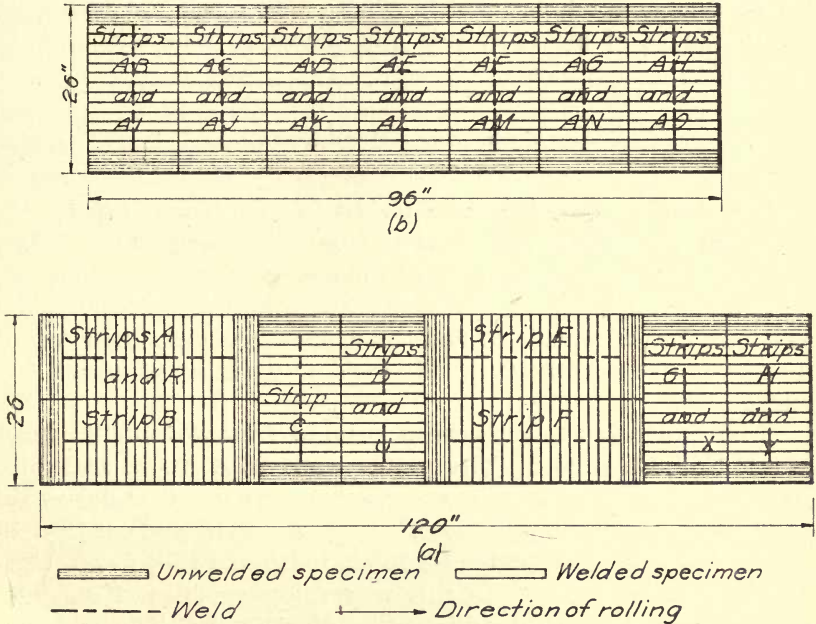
LOCATION OF STRIPS AND TEST SPECIMENS IN STEEL PLATES.
